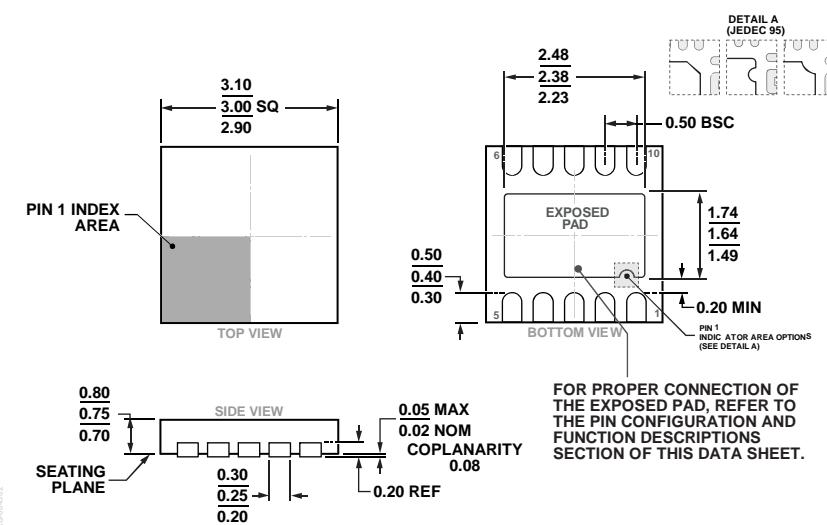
10-Lead Lead Frame Chip Scale Package [LFCSP]
